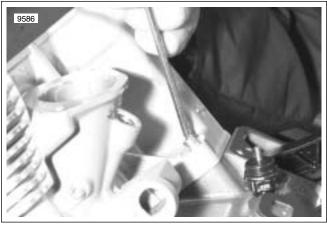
5 mm Head Fasteners @ 9.7 Nm (86 in-lbs)
